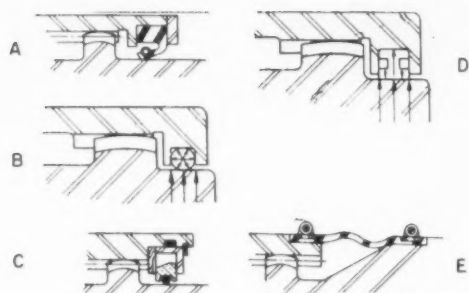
Schematic of several types of synthetic rubber seals showing (A) lip (B) "O" Ring (C) rising "O" ring (D) "H" or "T" shape (E) boot with garter springs.
